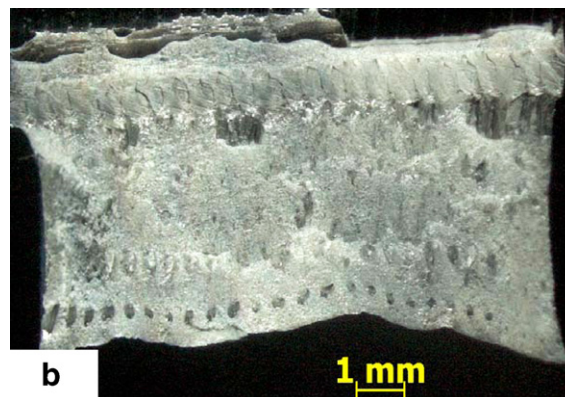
Onion-skin (OS) defects on a tensile fracture surface: weld 5 with tensile strength = 308 MPa, tool feed rate = 135 mm/min, tool speed = 254 rpm and tool pitch = 0.51 mm/rev.
